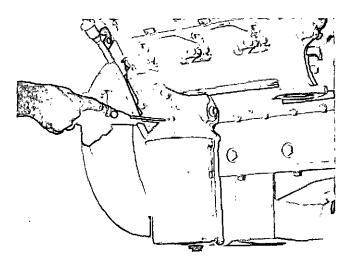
(V11466) Lubricating system priming point - small V-engine
